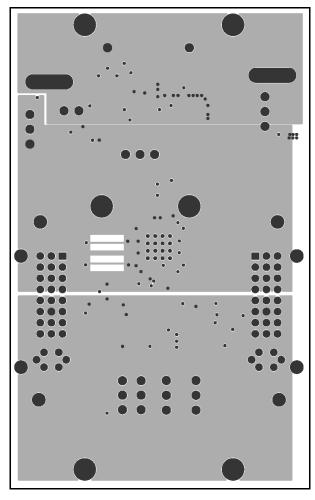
MAX3815 EV Kit PC Board Layout—Power Plane
